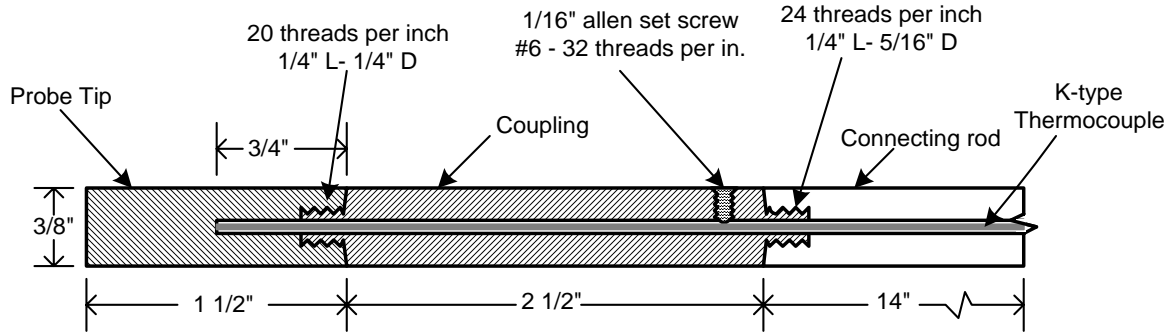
CHTE probe-coupling-connecting rod assembly
